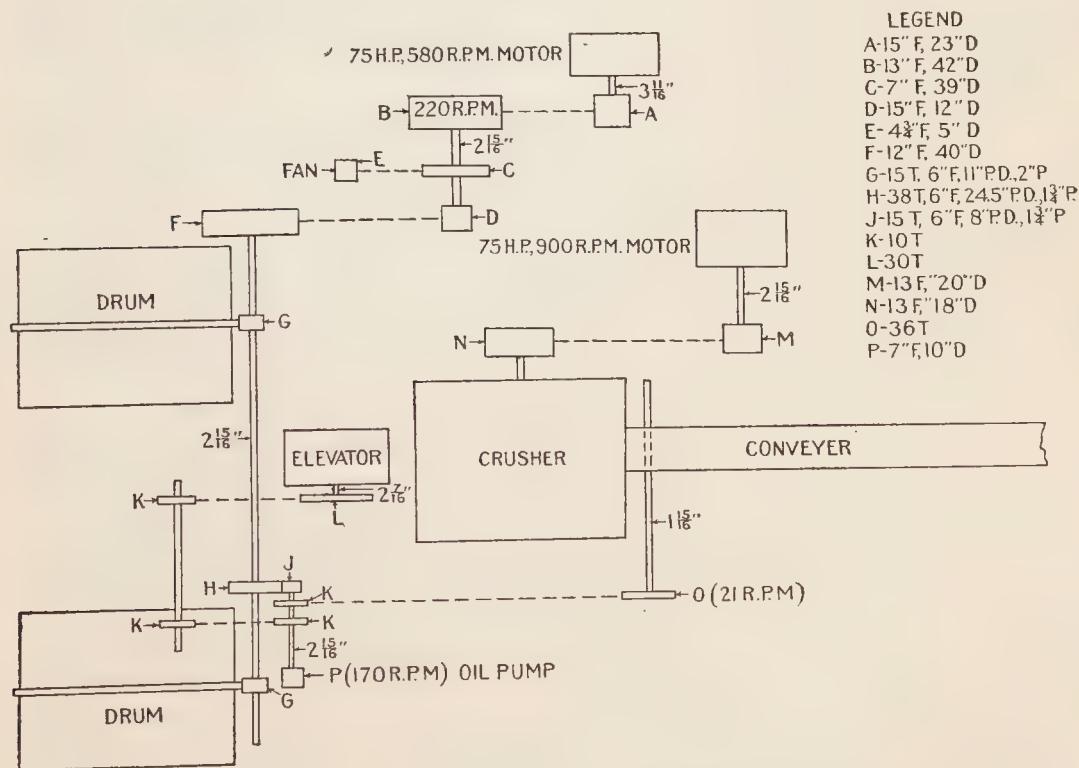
General arrangement of typical two-drum heating and mixing plant, Uvalde Rock Asphalt Company.
